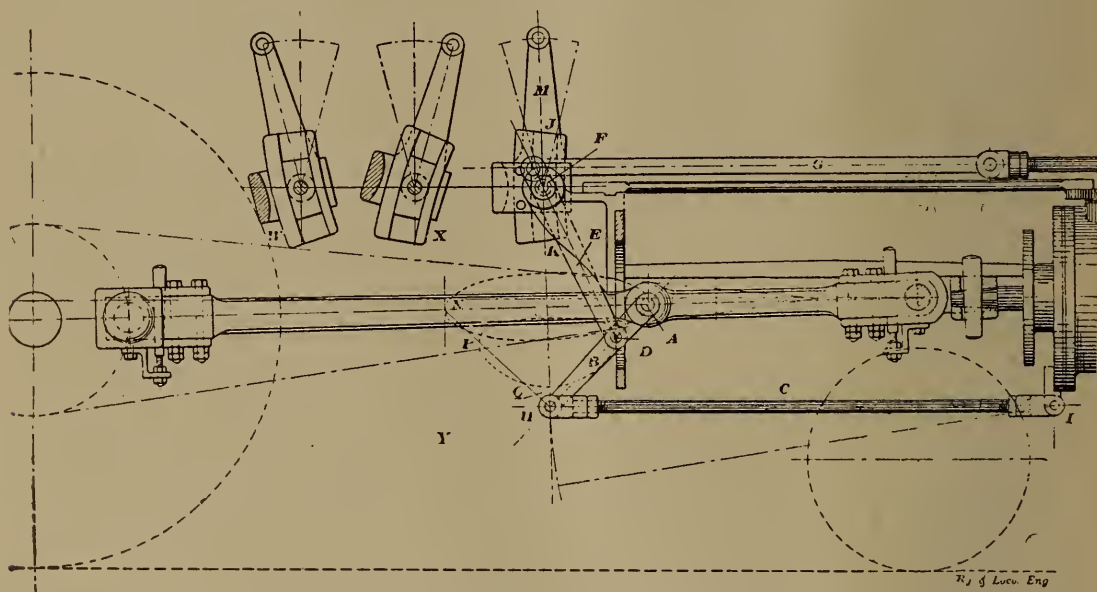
ELEVATION OF JOY'S VALVE GEAR.
